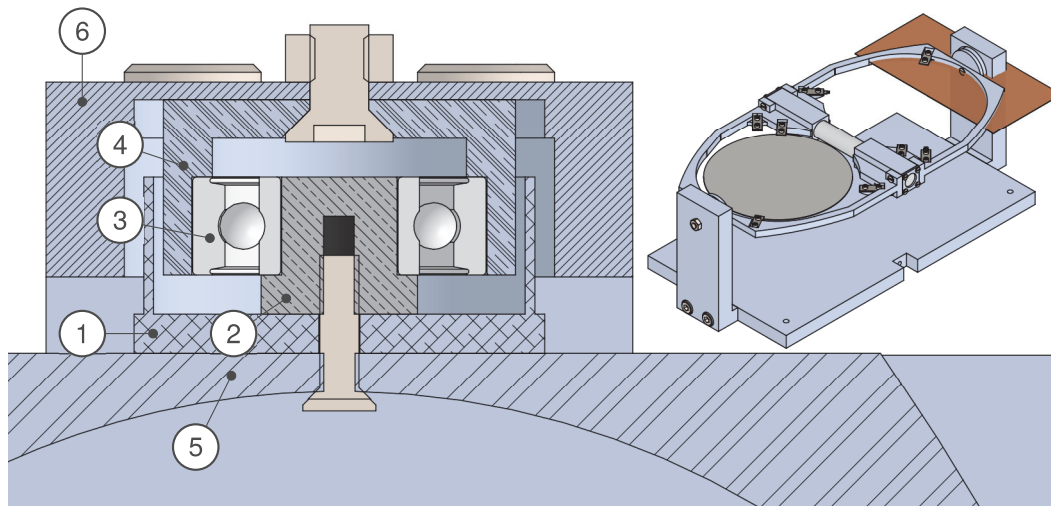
Sectional view of a ceramic ball bearing assembly. The insert at the top right corner indicate the cut plane position. The item numbering is identical to the one of figure 7.7.
